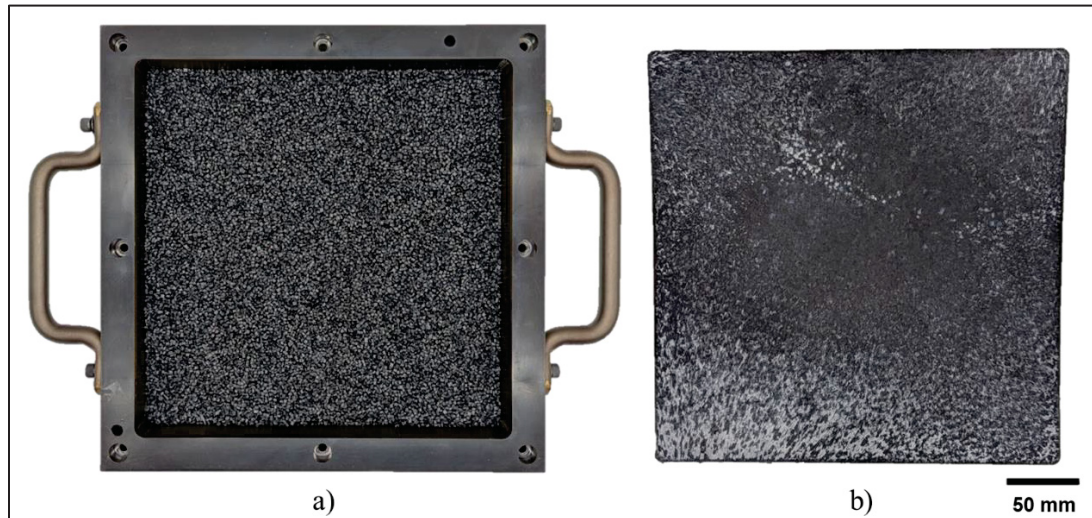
(a) Virgin CF/PEEK pellets introduced in mould cavity and (b) Representative compression-moulded panel
